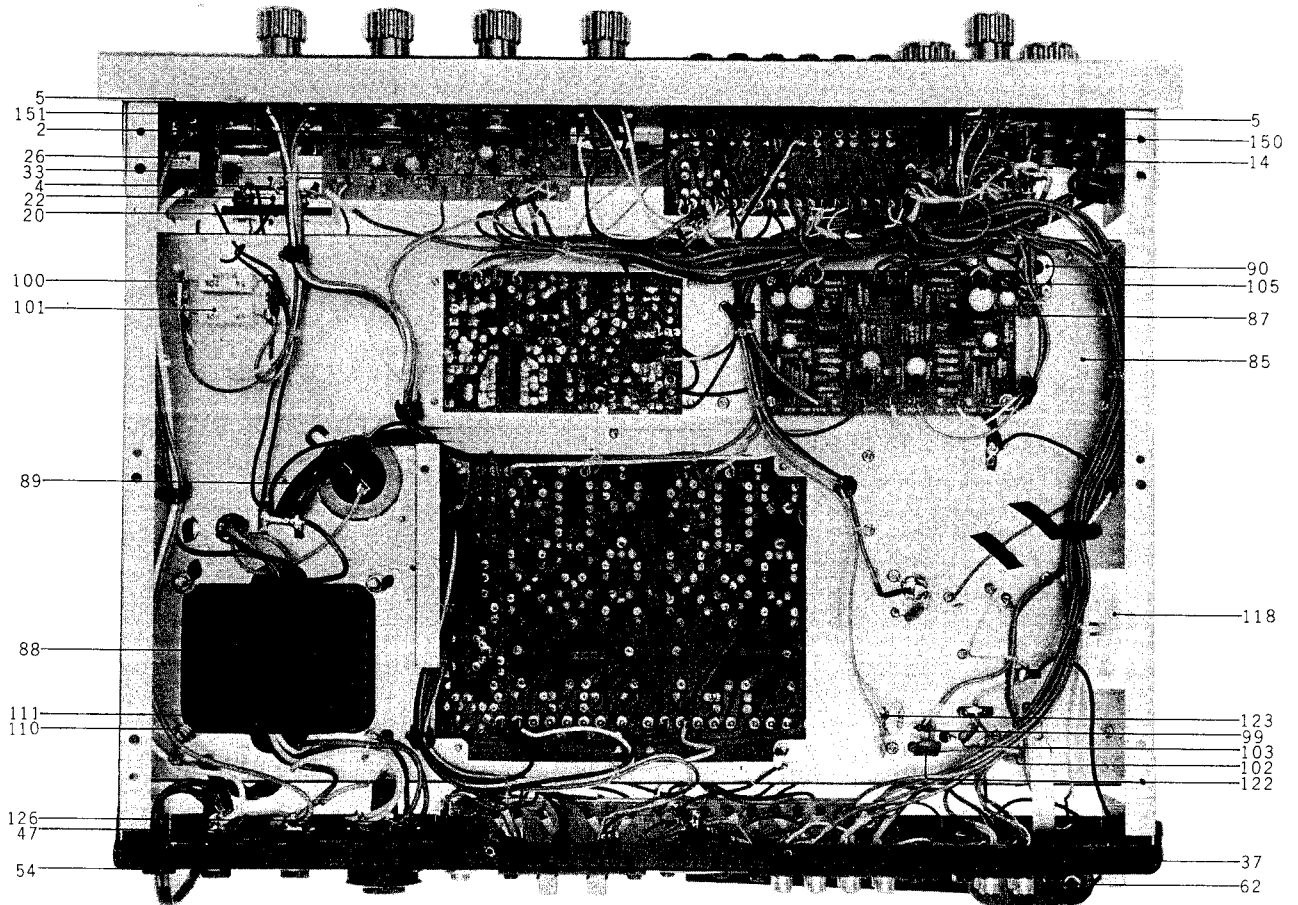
(C) PHOTO OF ASSEMBLY BLOCK
